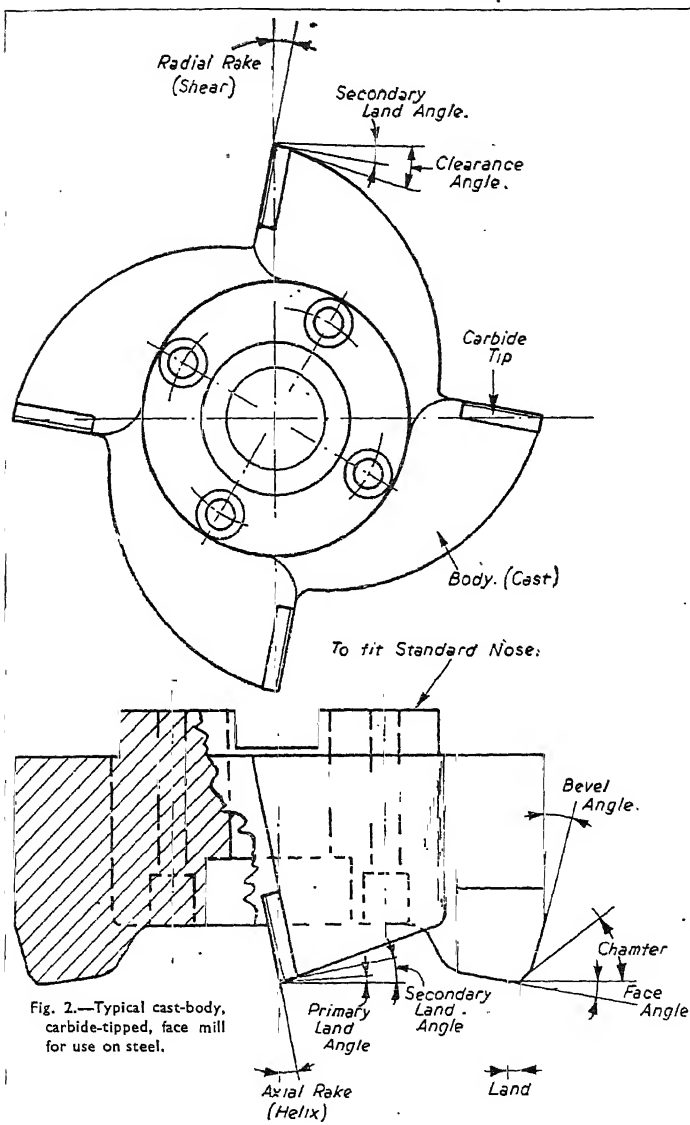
Typical cast-body, carbide-tipped, face mill for use on steel.
